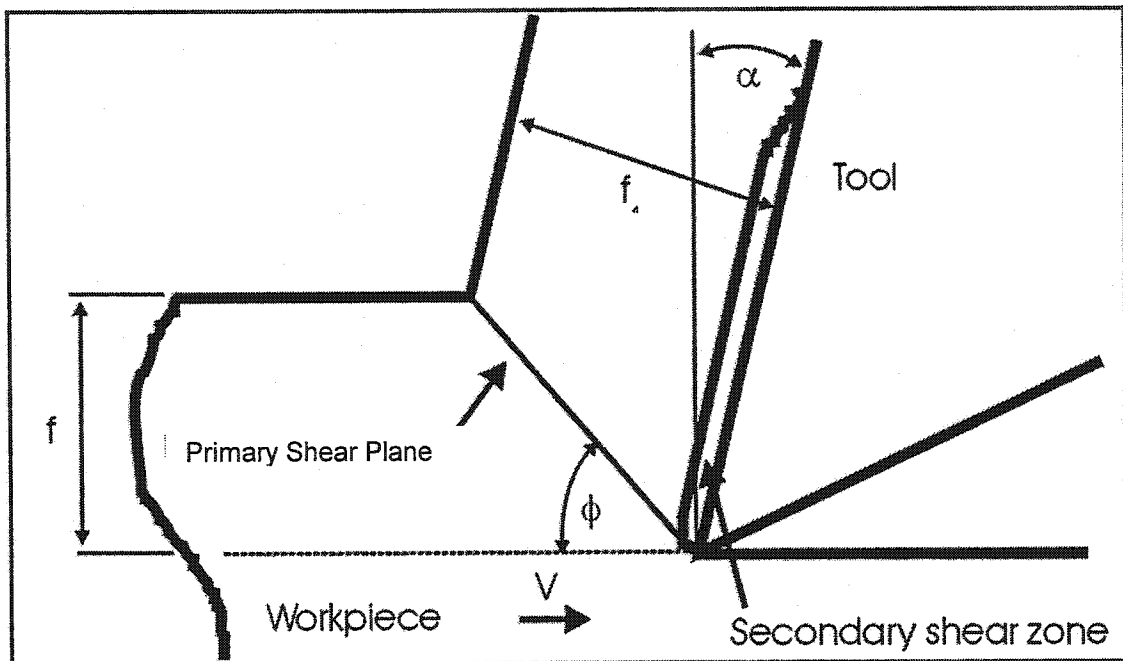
The process of metal cutting at the tool/workpiece/chip interface.
